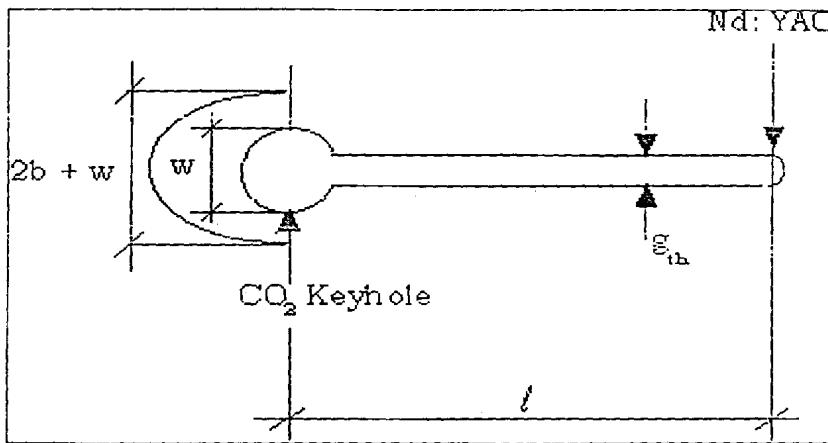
The cut and weld model showing slot and keyhole sizes
